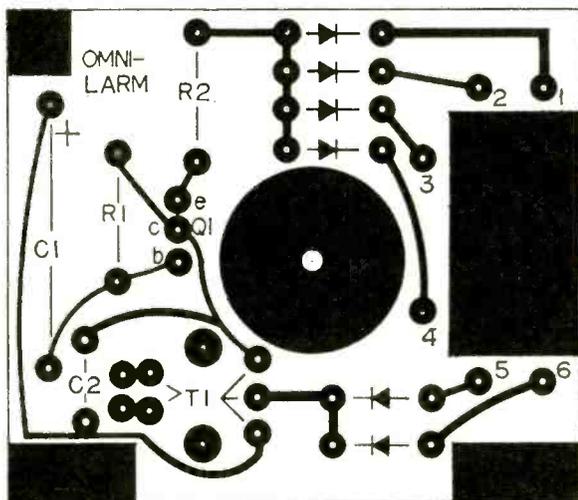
Actual-size printed circuit board layout. This view also shows how the components are arranged on the non-foil surface. Note in the photo of the completed project on the preceding page that there must be a rectangular hole cut in the side of the metal cabinet to reduce speaker loading.
